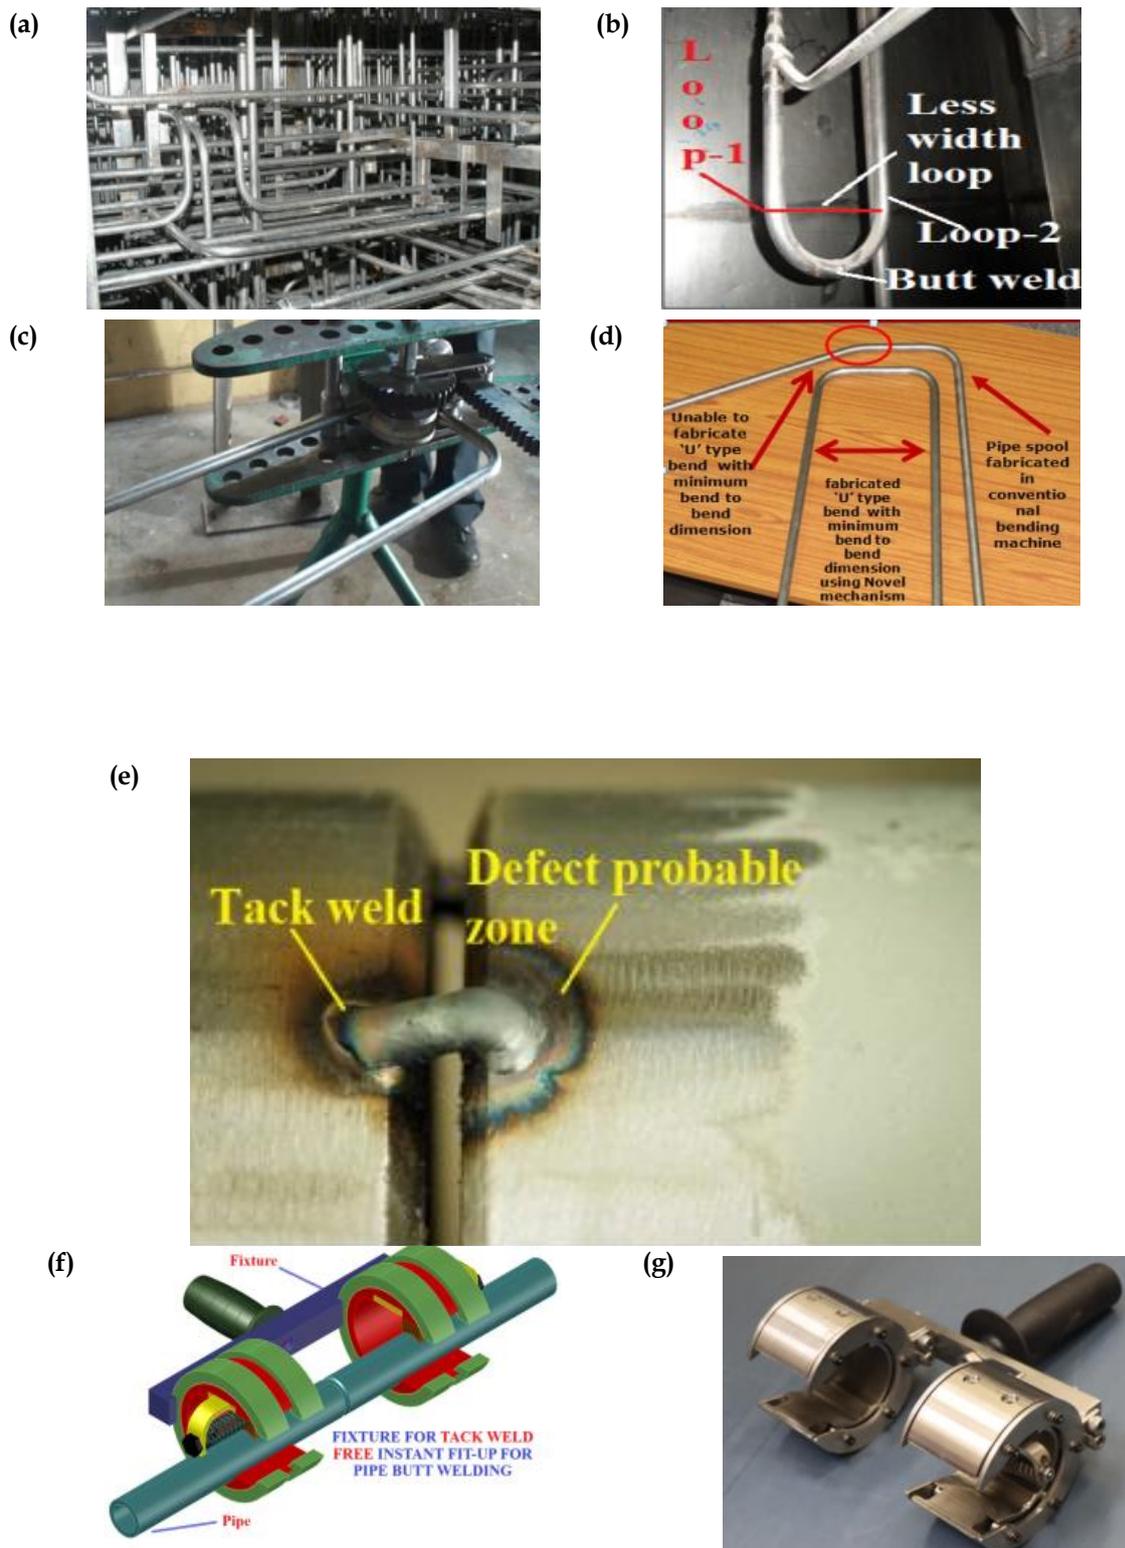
(a) Typical piping in DFRP, (b) Typical less width pipe loop, (c) Bending machine Fixture, (d) Loop formed with & without fixture (e) Tack weld (Typical), (f) Image of Butt weld fit-up fixture, (g) Mock-up Butt weld fit-up fixture.
